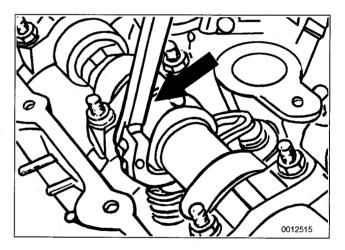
BMW special tool no. 11 5 130 (arrow) being used to depress valve stem to remove rocker arm.
